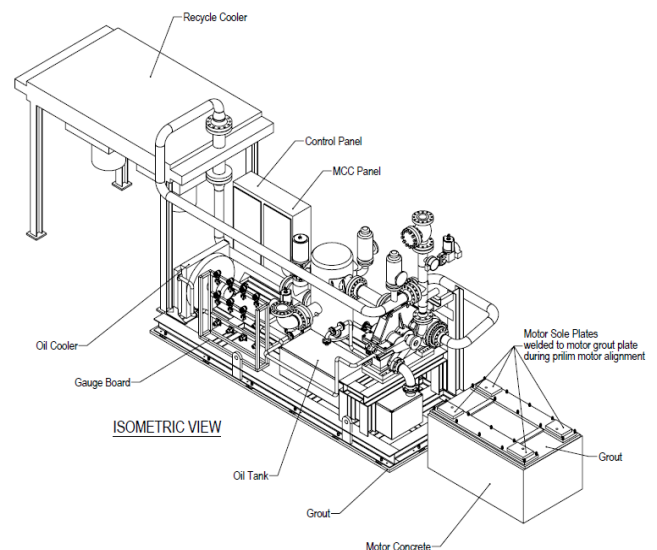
Packaged Layout of a High-Pressure, High-Temperature Air Compressor Showing a Recycle Air Cooler
